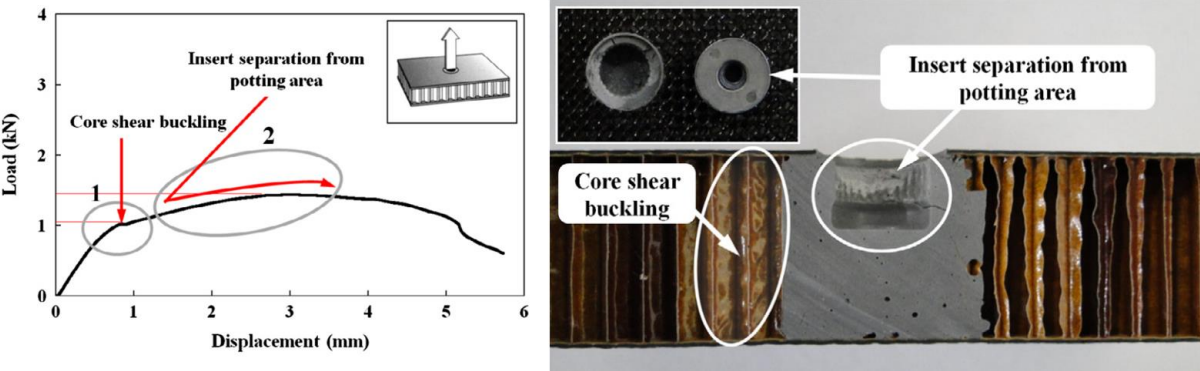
Detaching of the fastener of a sandwich panel insert, this may suggest that the potting was the first element to fail [39].
